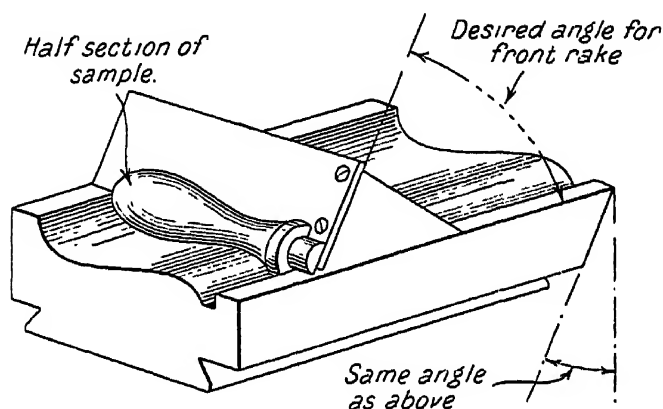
DETERMINING THE SHAPE OF A FORM TOOL FOR A JOB HAVING A COMPLICATED SHAPE
